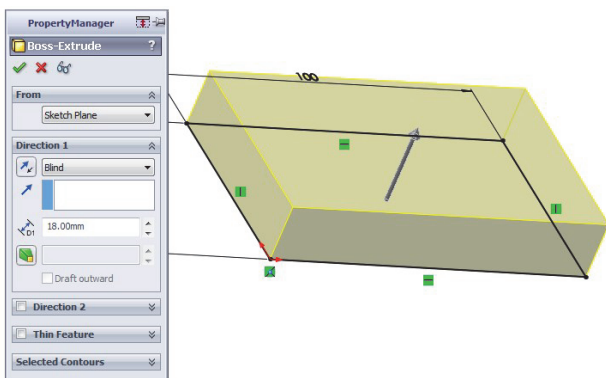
Giving the sketch a third dimension (Boss-Extrude)
